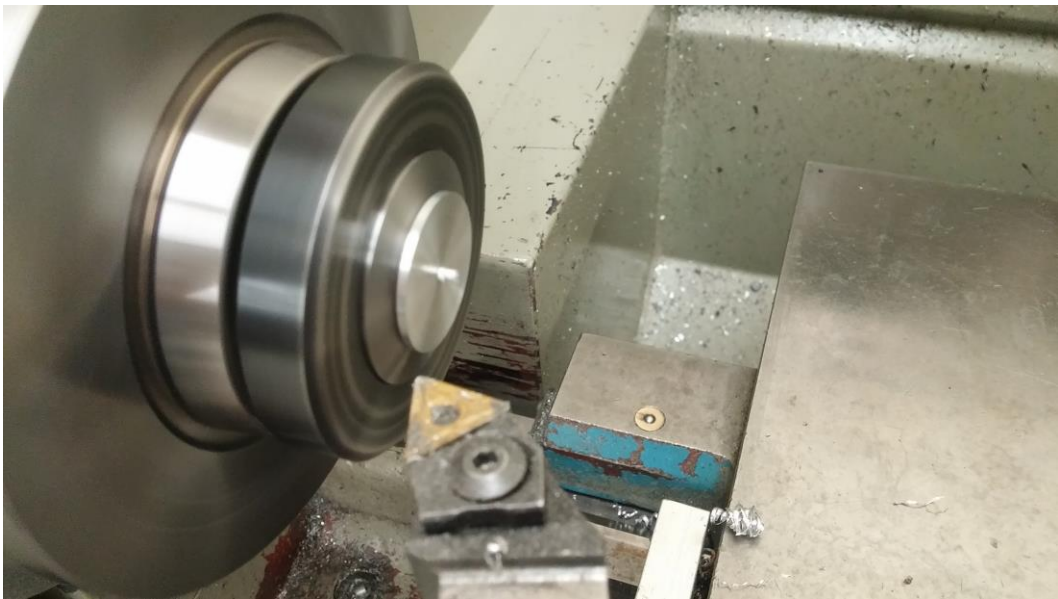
Facing the parted surface to the desired flange thickness of 0.1".
